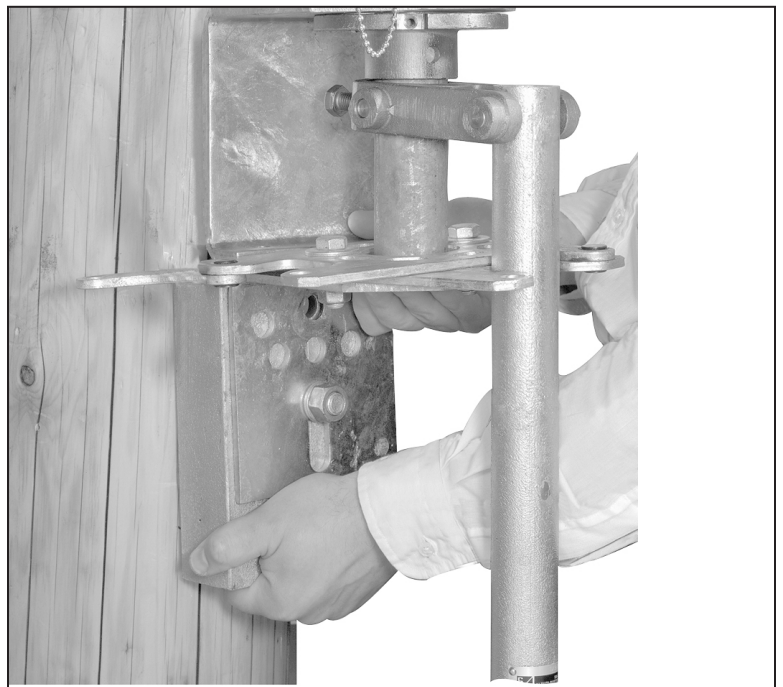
Position the interlock bracket, locking disc, operating handle assembly, and foot-bearing assembly onto the lowest vertical operating pipe section.
